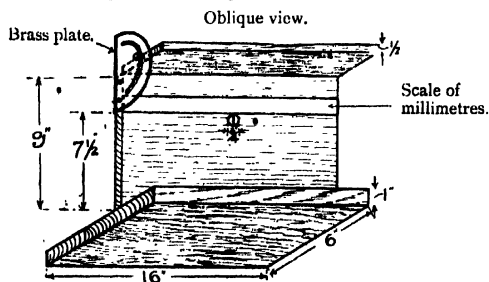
SCALE-BOARD FOR USE WITH REFLECTING GALVANOMETER.
